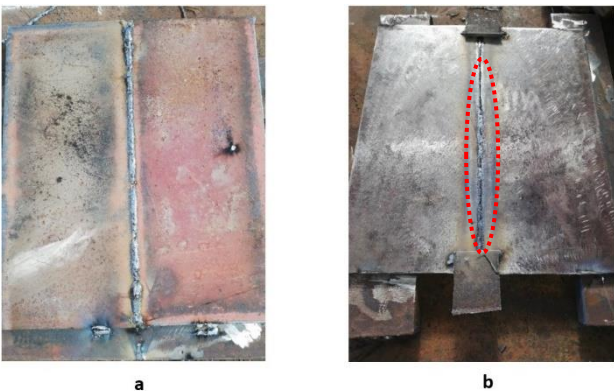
Third welding joints: a) Face pass. b) Root pass
